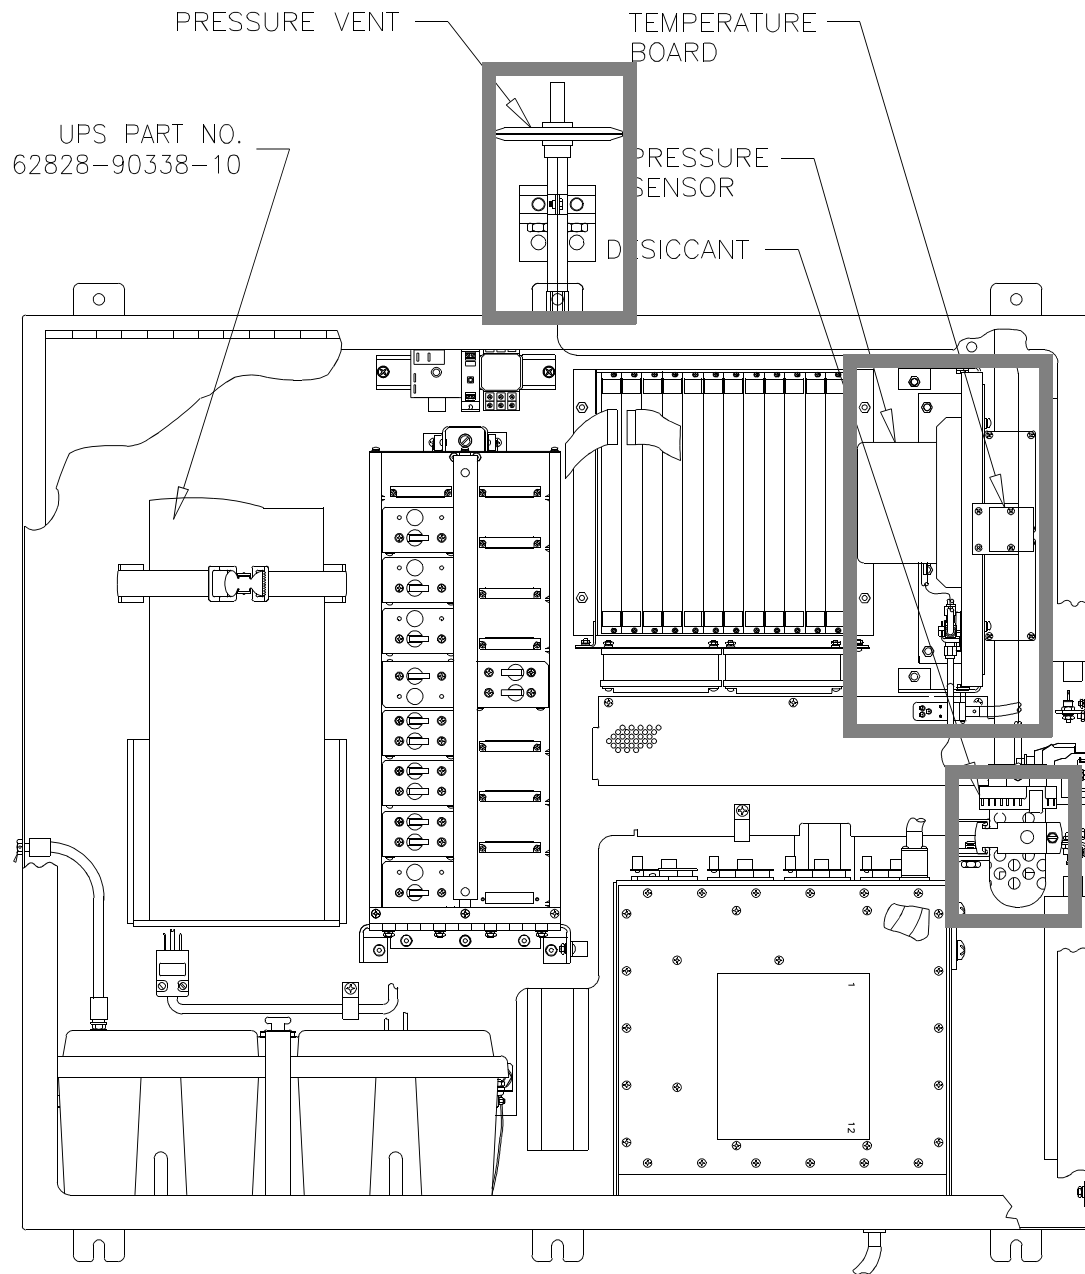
DCP Equipment Cabinet - Locational View (Sheet 1 of 2)
